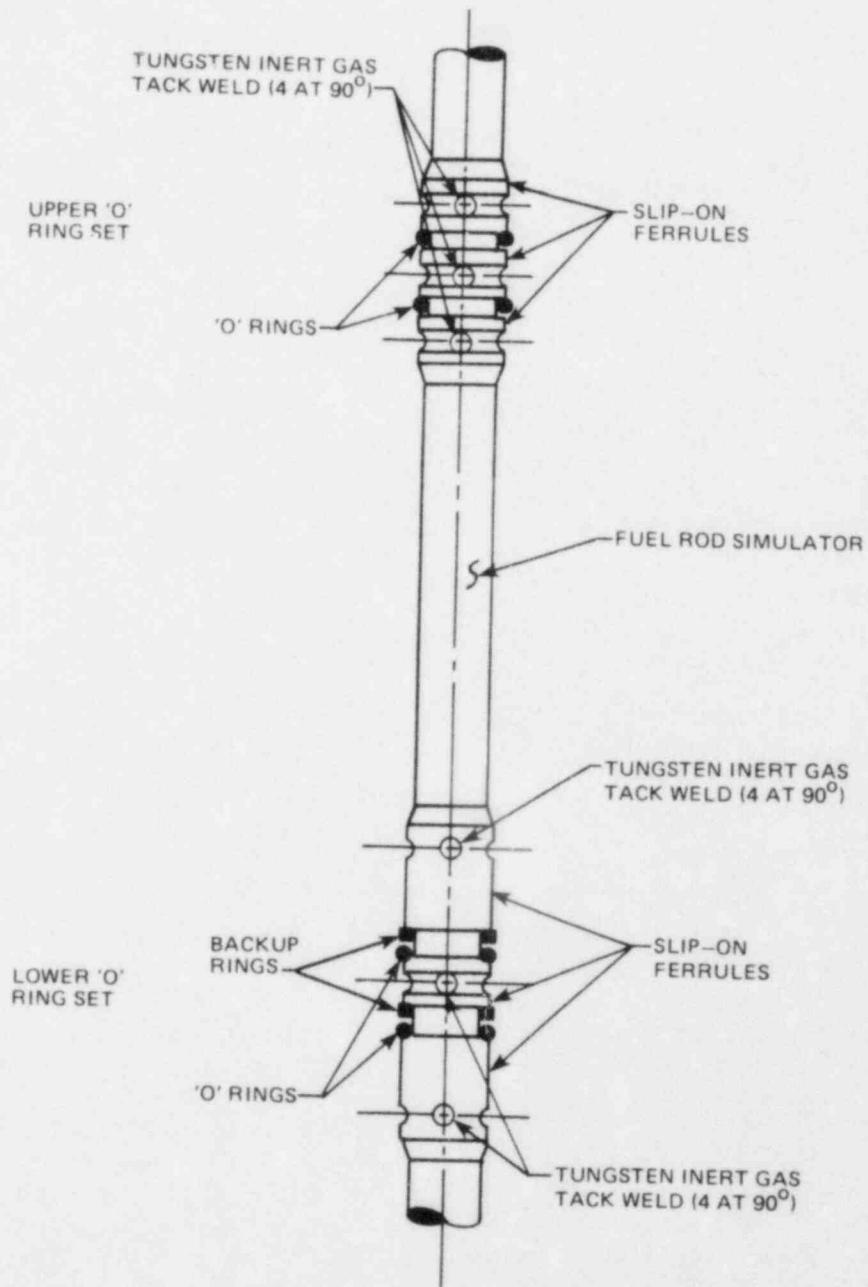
Details of THTF Bundle 3 FRS O-ring region.
